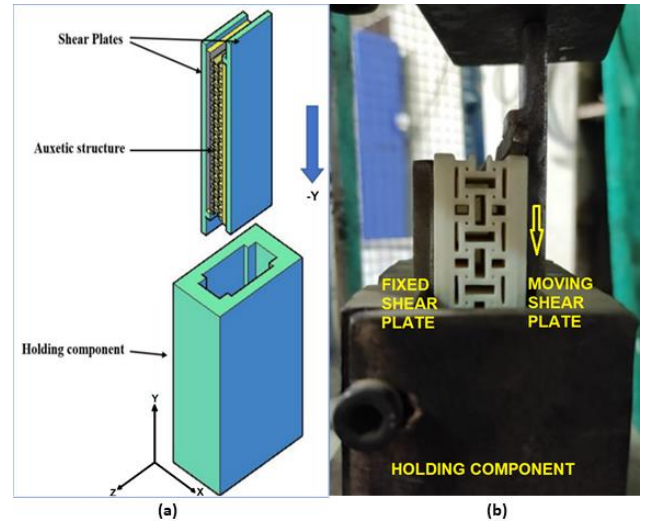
(a) 3D CAD model of the novel fixture, (b) Actual photograph of fixture for shear testing of structure
